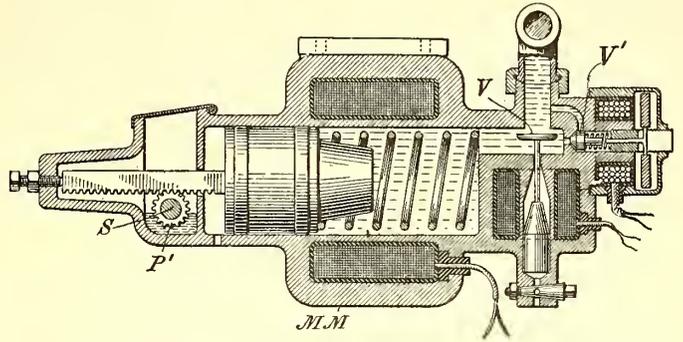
CROSS-SECTION OF MASTER MAGNET, SHOWING VALVE WHICH REGULATES THE RAPIDITY WITH WHICH RESISTANCE IS CUT OUT OF CIRCUIT
